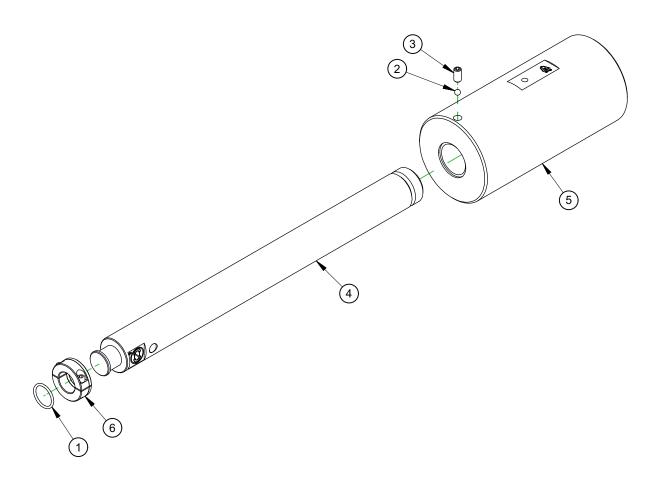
TURNING ARM ASSEMBLY 38" (965 MM) (P/N 80304)
